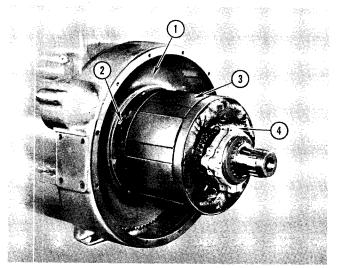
ROTOR, STATOR REMOVED 1. Engine Flywheel Rotor 3. 2. Capscrews Brushes 4.
